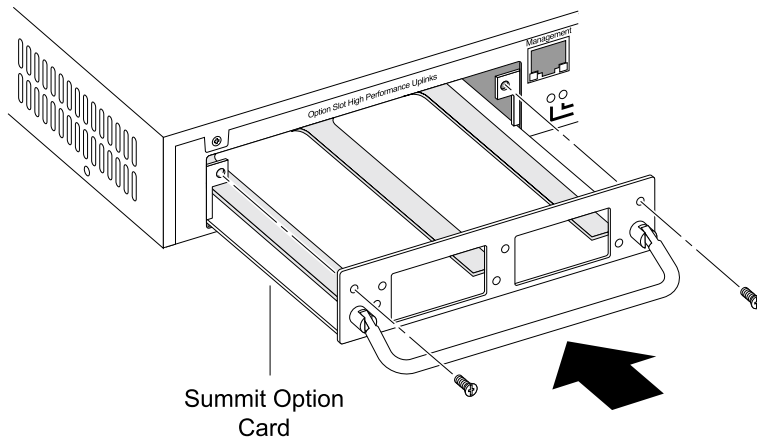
Installing a Summit Port Option Card (XGM-2xn Shown)
